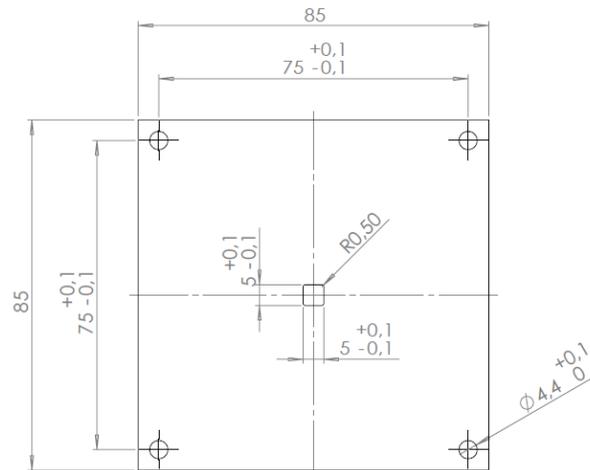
Inner MISPS PCB mechanical drawing plane detail
